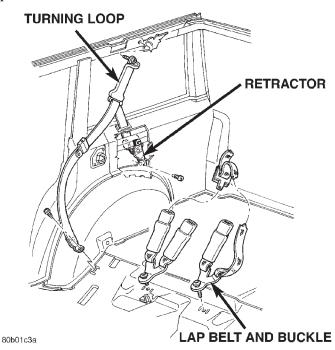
Rear Seat Shoulder/Lap Belts and Buckles INSTALLATION
